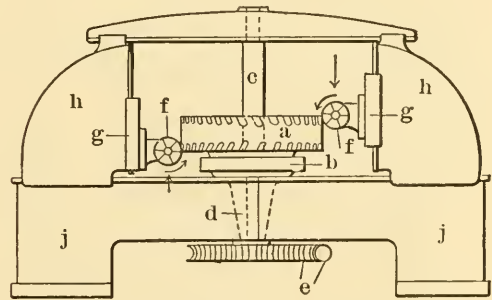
DIAGRAM OF HOBBIING PROCESS FOR CUTTING DOUBLE HELICAL GEARS.
